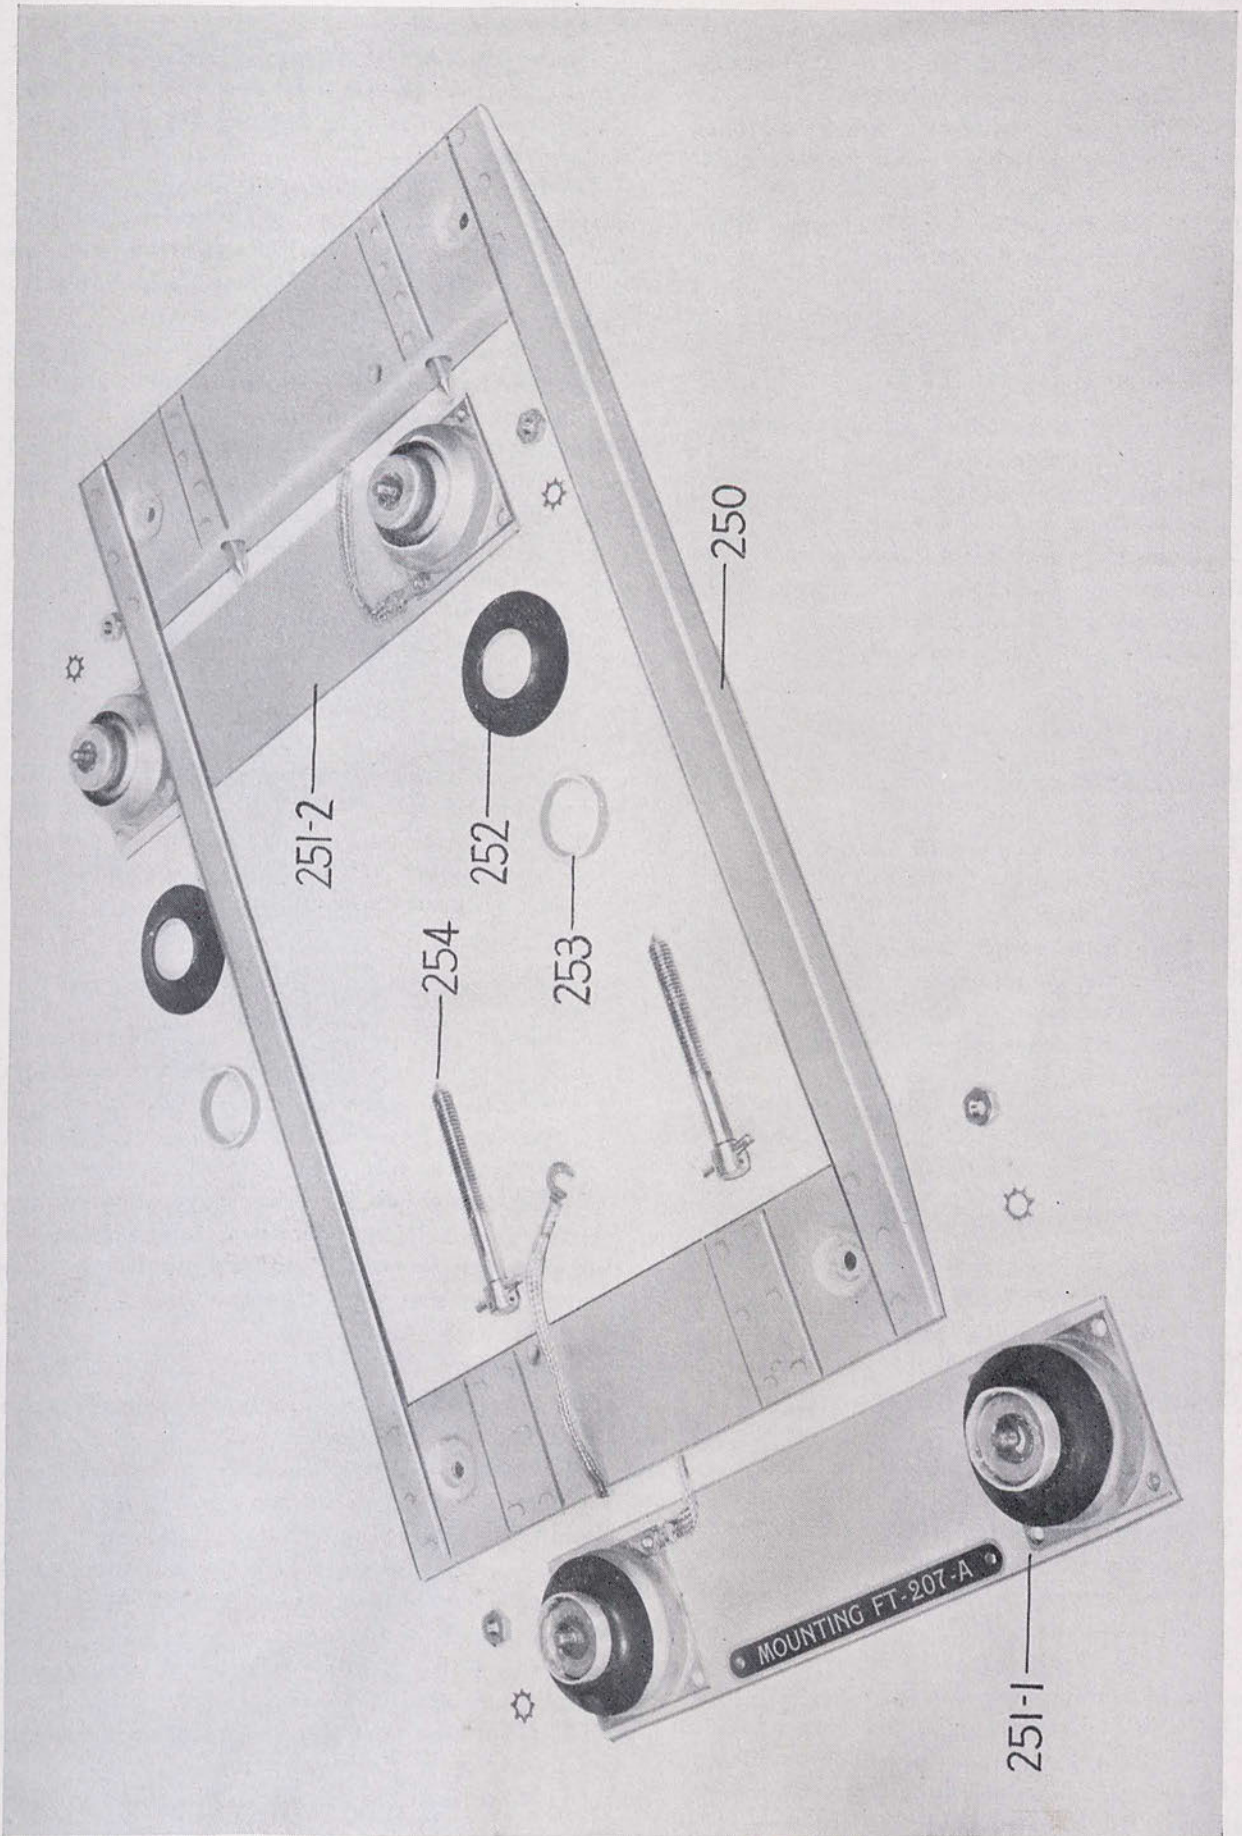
MOUNTING FT-207-A, DISASSEMBLED
